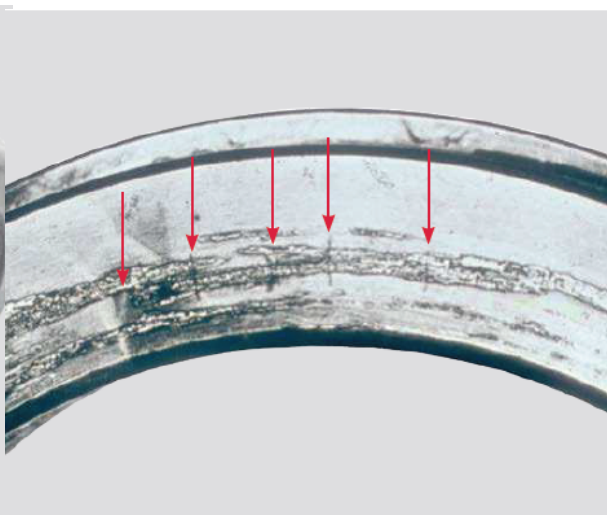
Transverse thermal cracks on the small side face of the inner ring of a tapered roller bearing
